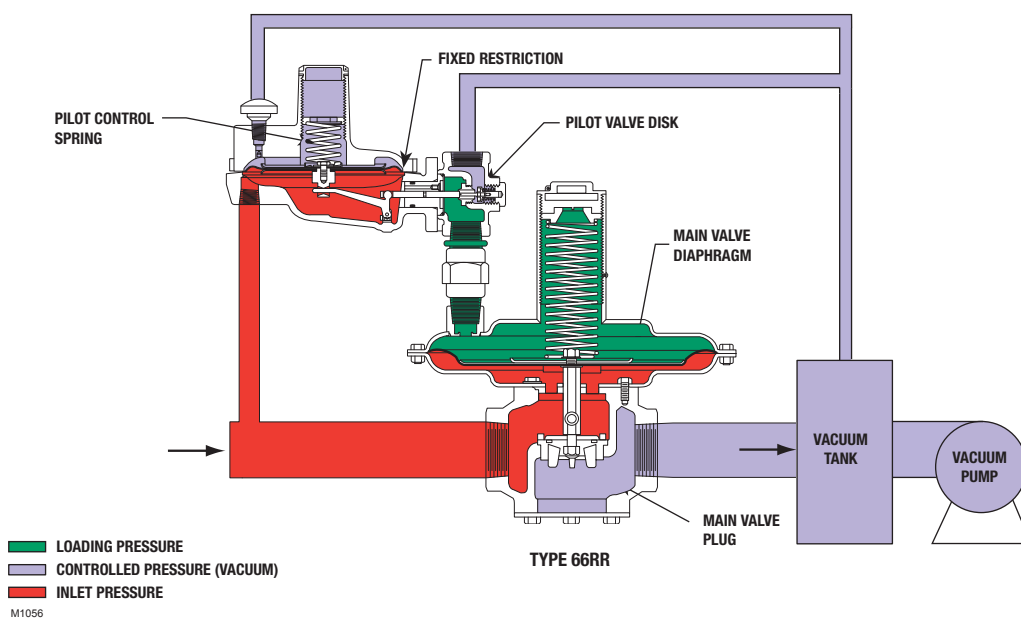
Type 66RR Relief Valve used in a Vacuum Breaker Installation
